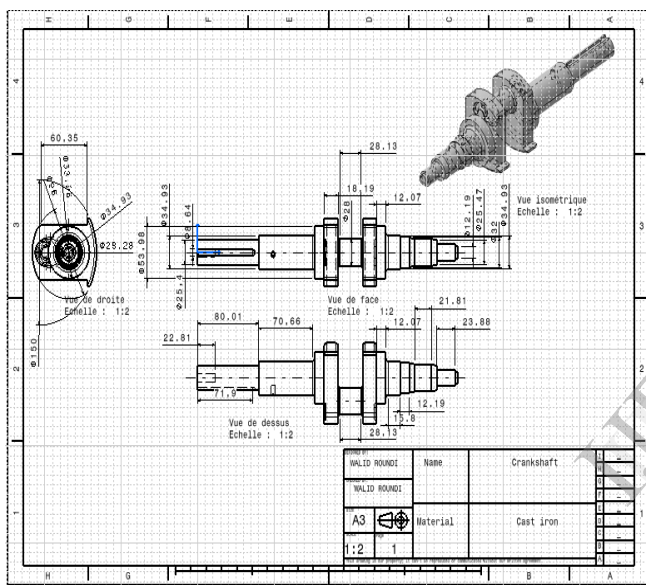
Drawing of the cast iron crankshaft with measured dimensions noted (mm)
